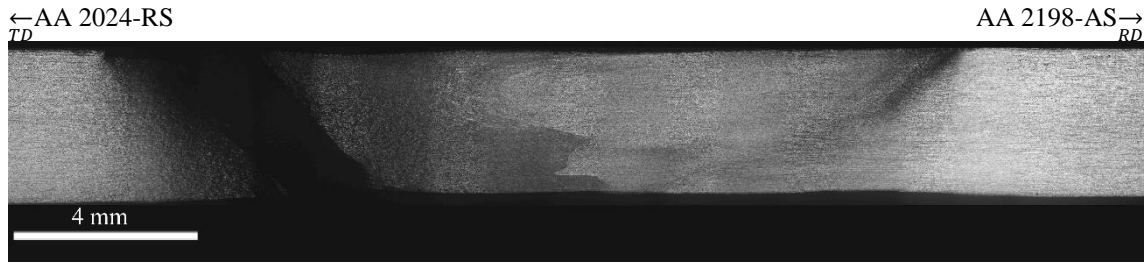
Ratio between pin and weld nugget cross-sections.
